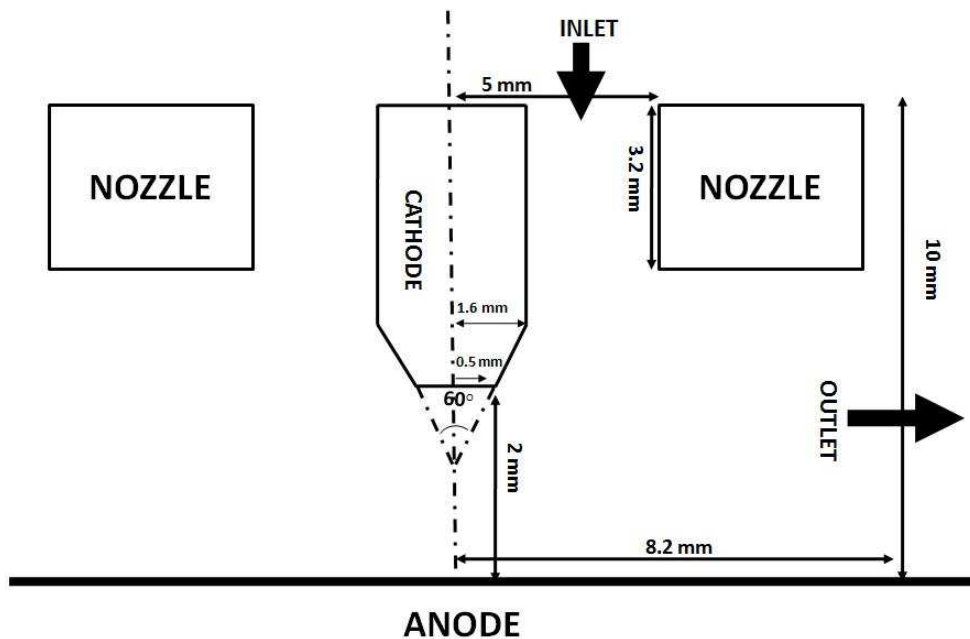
A schematic representation of 2D axi-symmetric arc welding.
